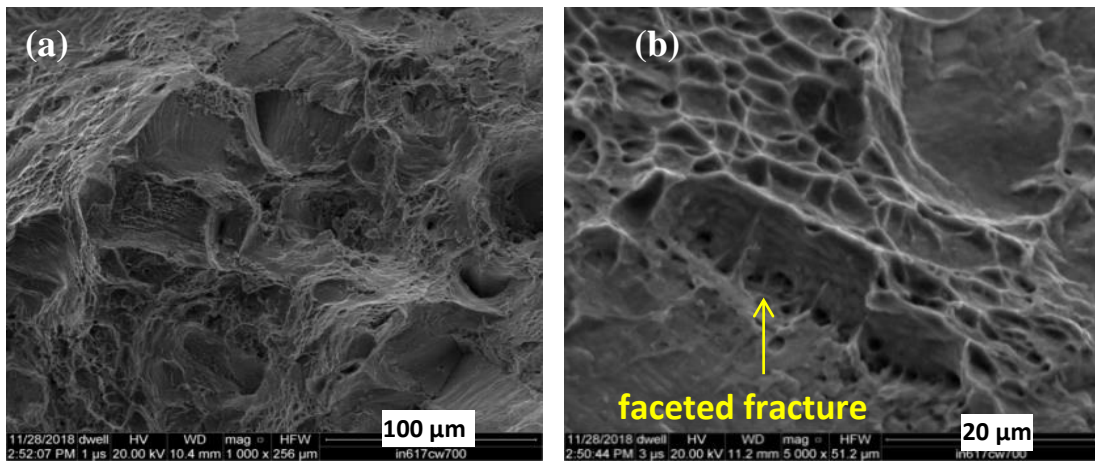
SEM fractographs of tensile tested samples at 700°C in SQ-CW condition showing: (a) dimples with cleavage facets and (b) magnified view of the facets.
